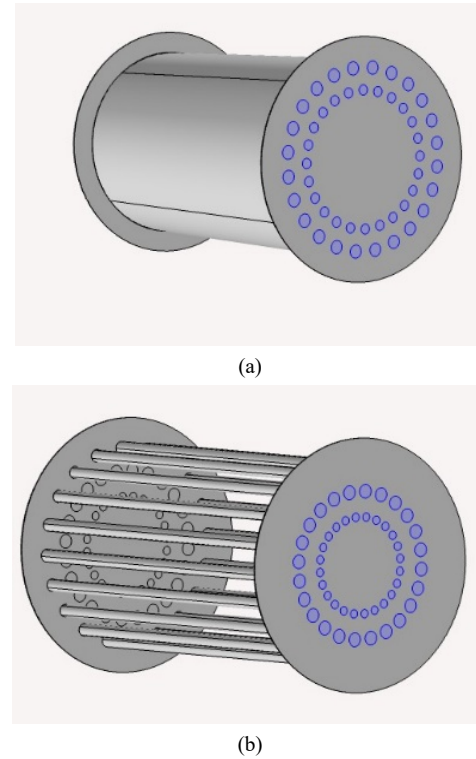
Cable drum structure diagram. (a) Enclosed cylindrical drum. (b) Squirrel cage cylindrical drum.
